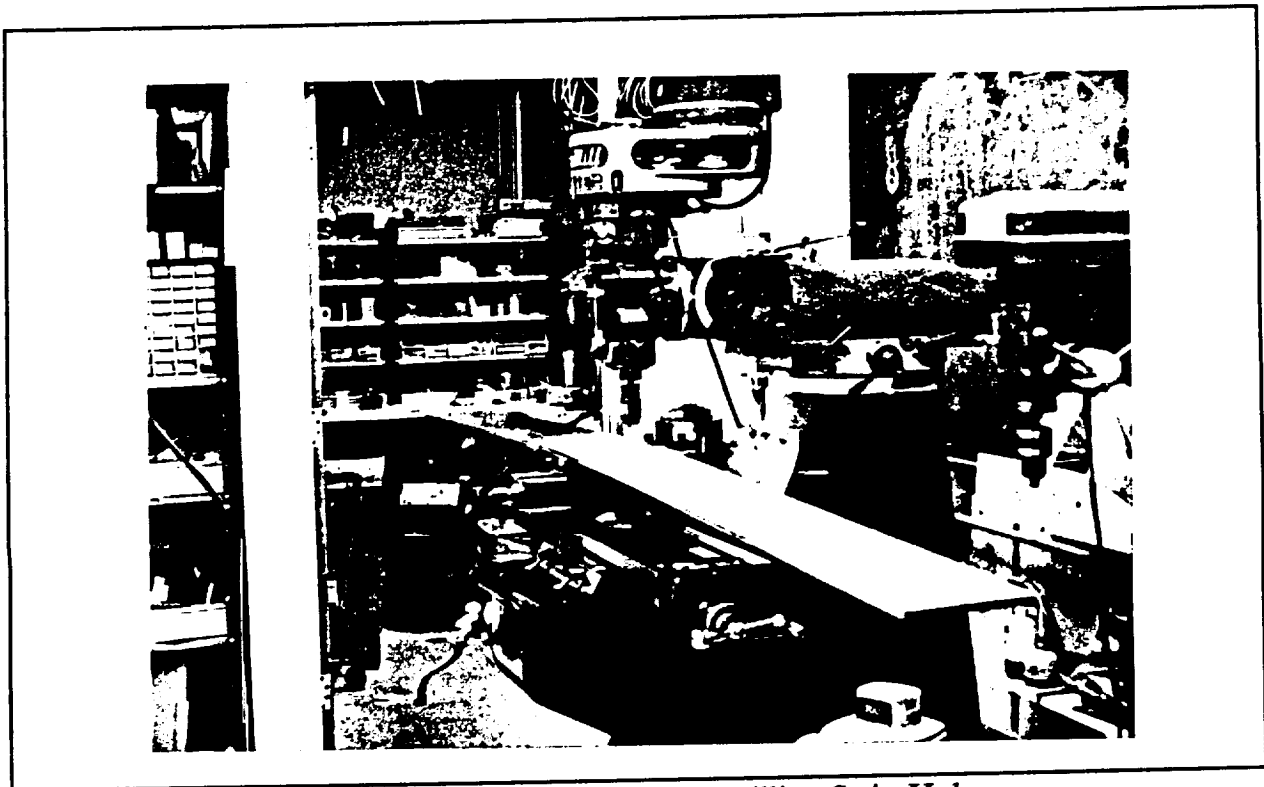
Mill and Stacked-strip Holder Used for Drilling Strip Holes
